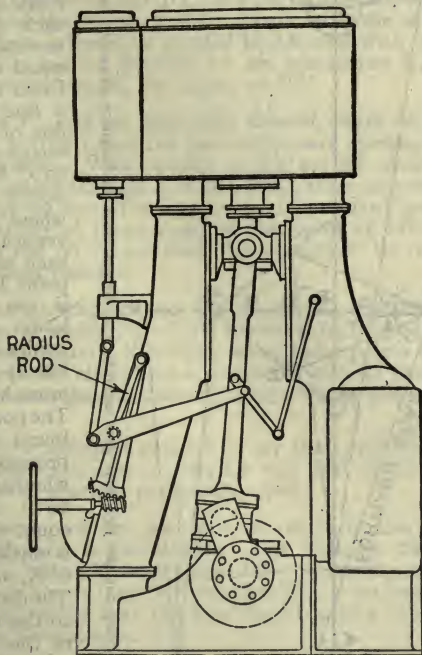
Joy valve gear, radius rod type. The substituting of a radius rod in place of the link avoids the objectional friction and wear of the latter.
